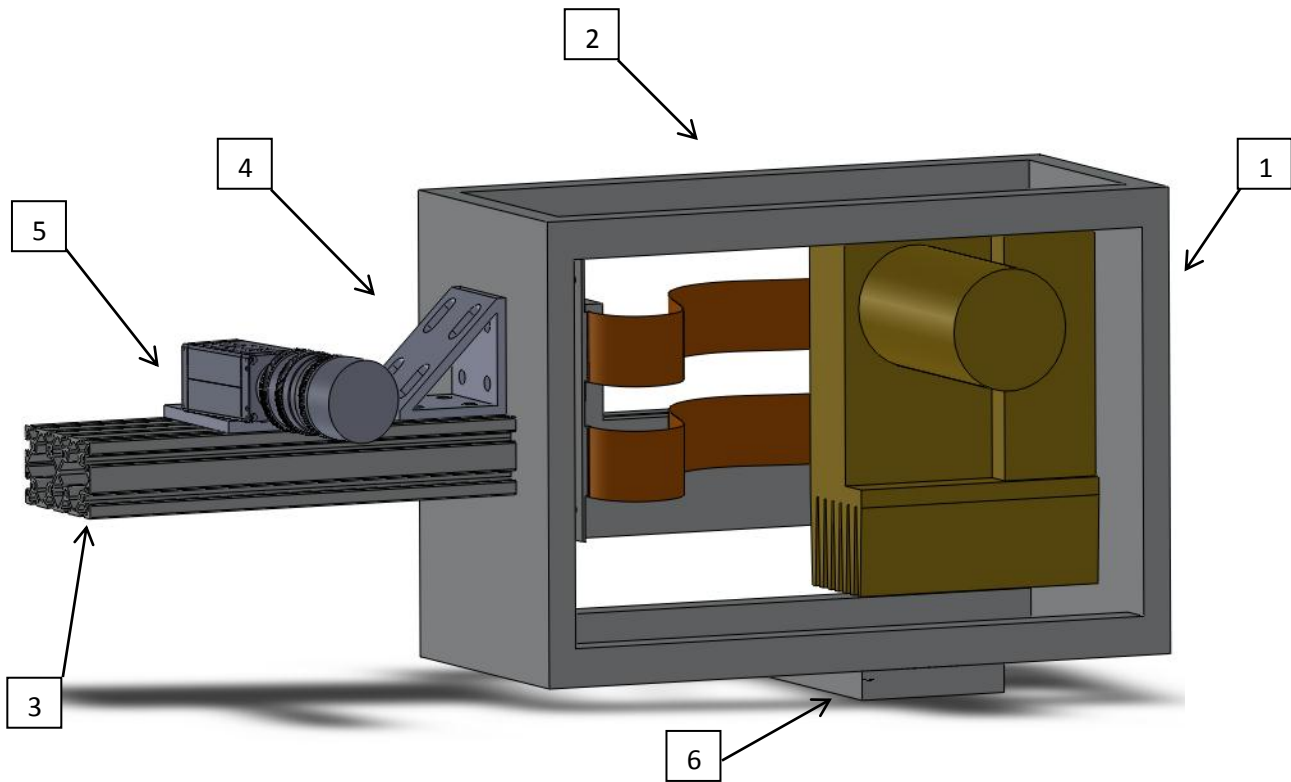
First generation prototype of system: (1) aluminum plates for projector/FPGA board support, (2) rails for structural support, (3) camera mounting arm, (4) camera mounting bracket, (5) camera adaptor plate, and (6) tripod adaptor plate.
